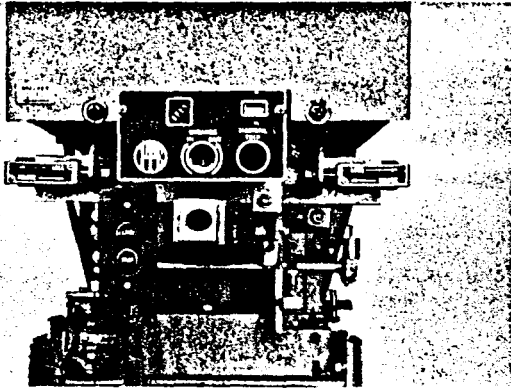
5HV-75 Racking and Indicator Assembly, "Unlock" Position
